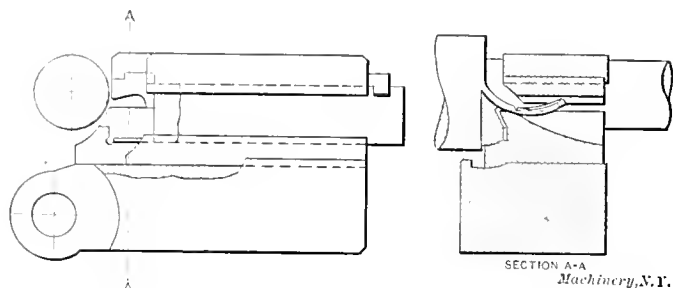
Chip Breaker used in the Flat Turret Lathe.
